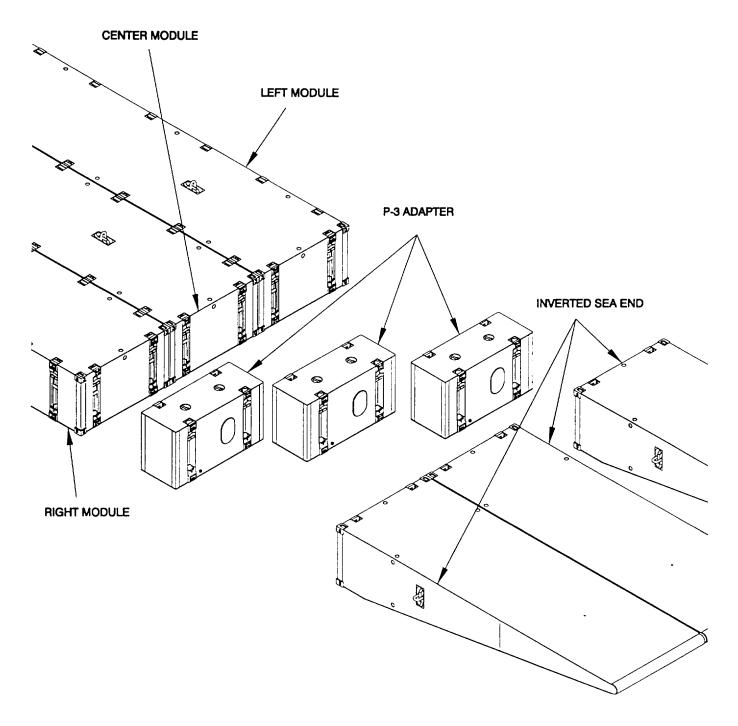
Assembled Alternate Beach/Sea End Section with P-3 Adapter.
